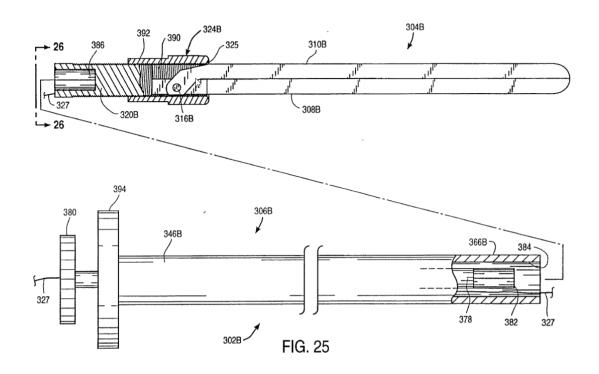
is a cross sectional perspective view of a clamp and a clamp positioner. *Id.* 16:53–59.
